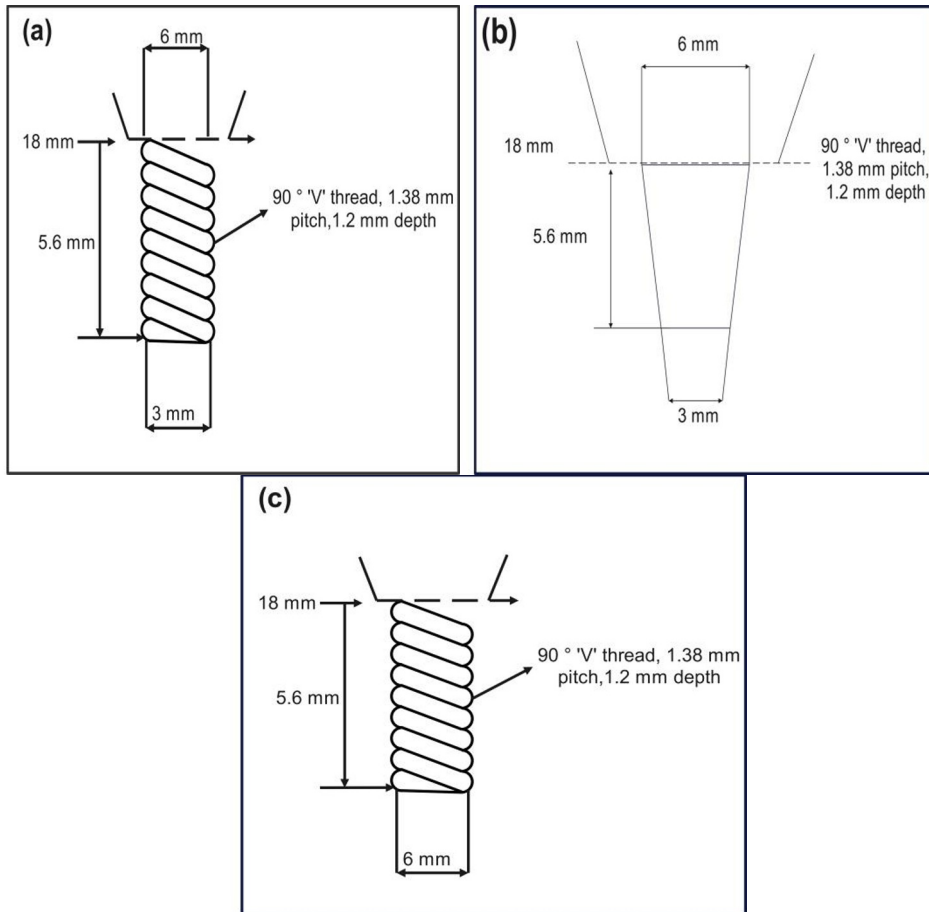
Tool pin dimensions: 'V' thread 90°, pitch 1.38 mm, depth 1.2 mm, tool radius 0.1 mm
